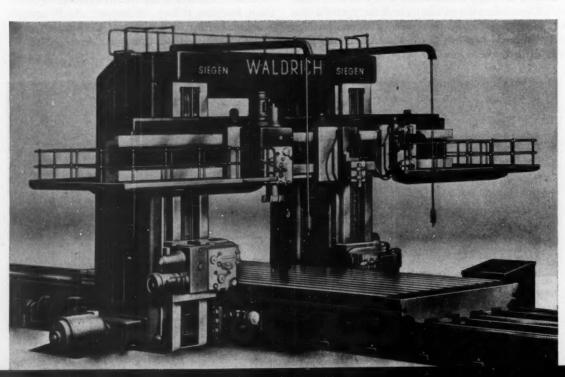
Table of this large planing machine is fitted with two helical racks and driven by two main motors, one on each side of column.
